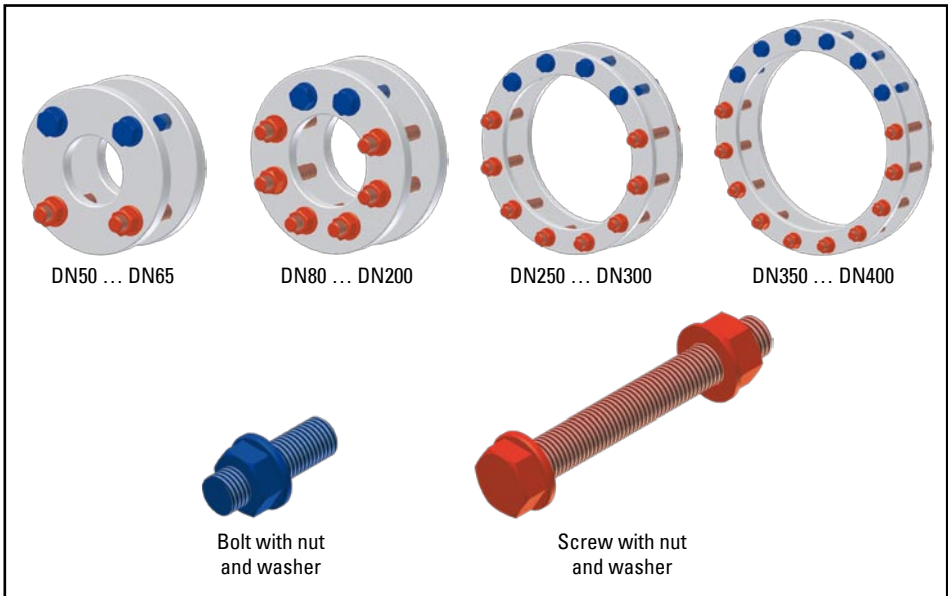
Flange and boring details, flanges are pictured simplified
